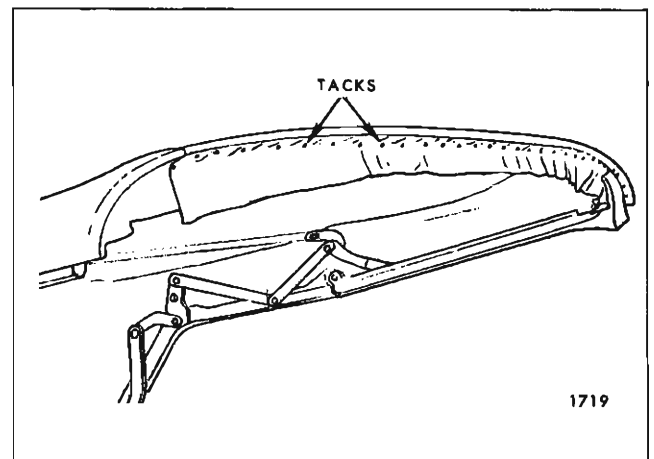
Installation of Top Material To Front Roof Rail
